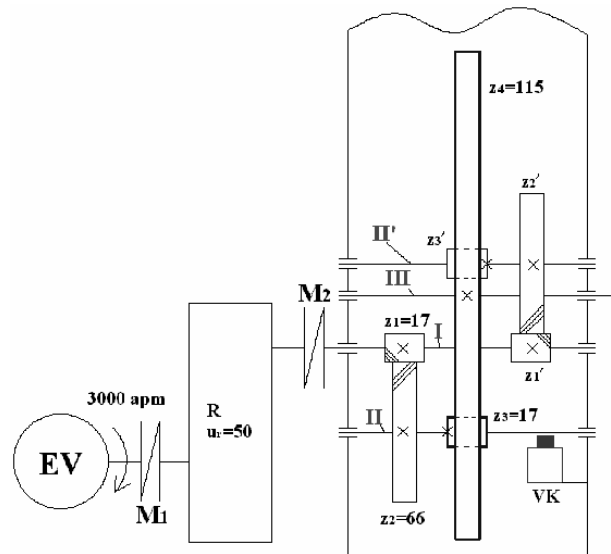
Kinematics' diagram of gear driver in diffusion machine: EV – electromotor; M1 and M2 – elastic couplings; R – reducer; VK – sensor of shaft vibration displacements, I, II, and III rotors
